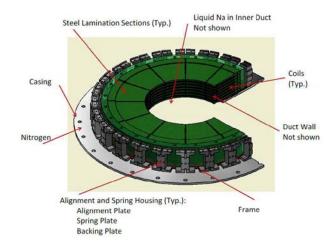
Outer stator coil assembly of the PGSFR IHTS ALIP Pump.
